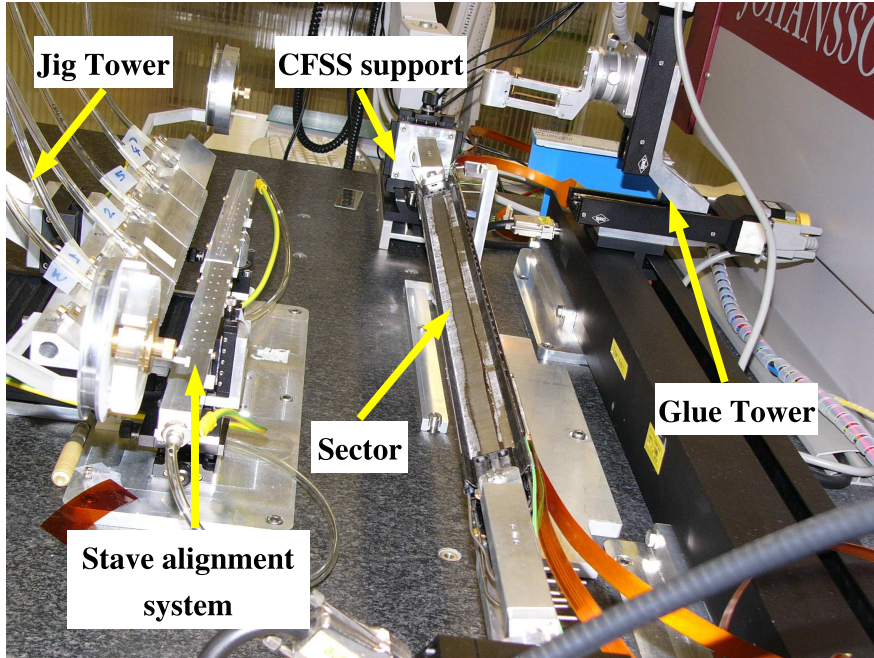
Layout of the SPD Barrel Sector Assembly System.
